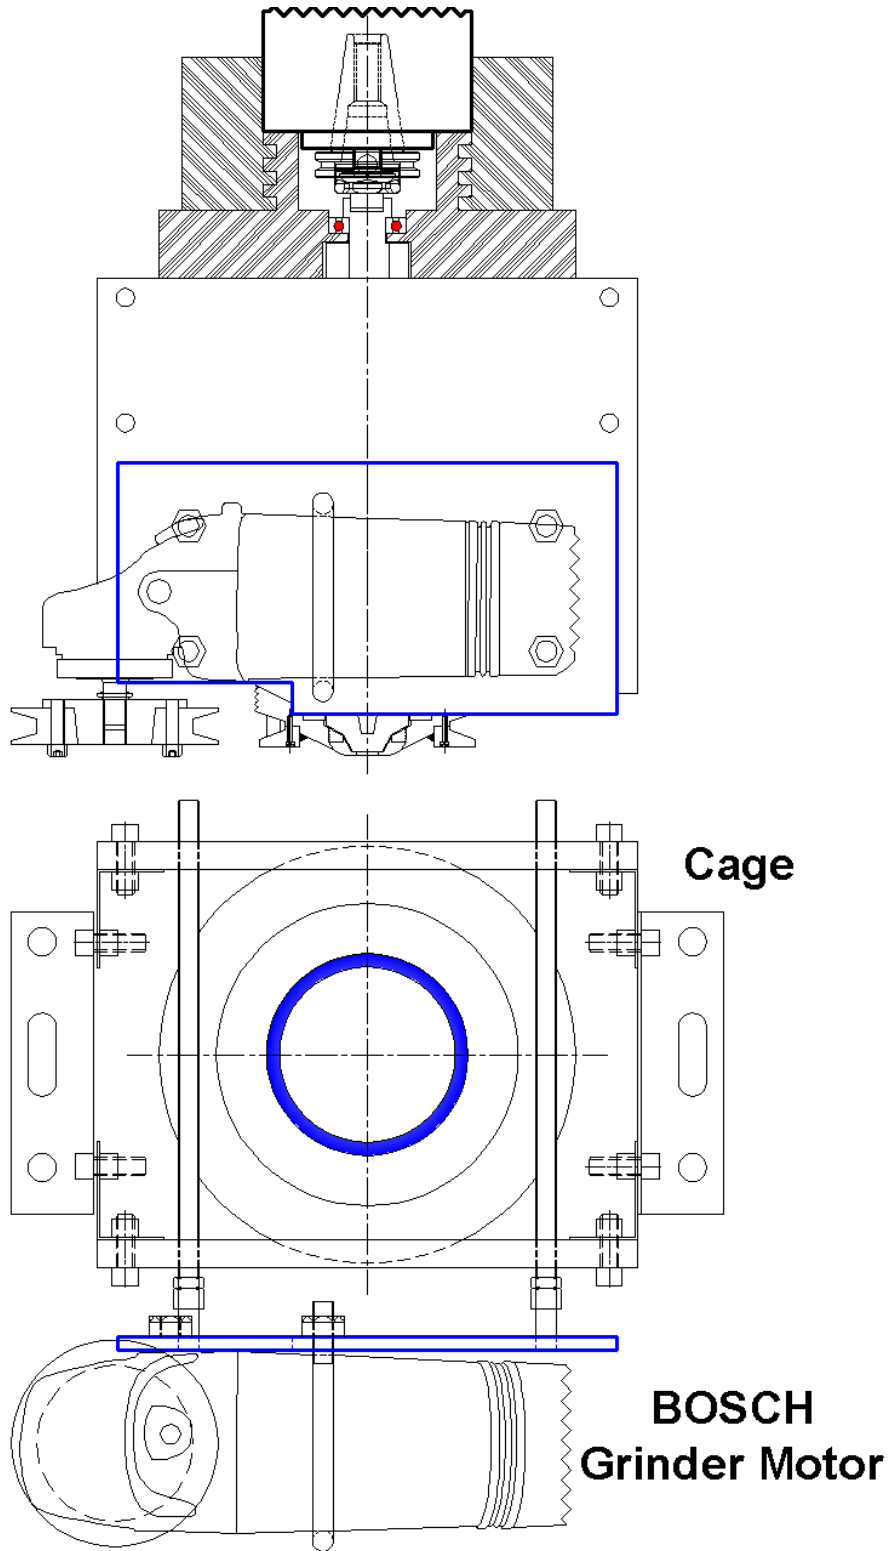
Modified friction driven stitch welding apparatus with Bosch grinder motor as a power supply to the shoulder.
